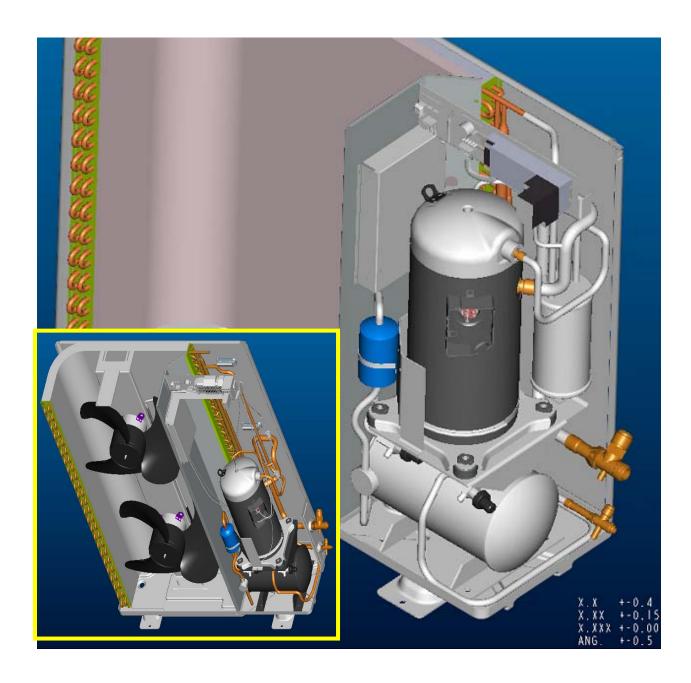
3-Dimensional Views of Selected Component Layout ( not to be used for dimensioning or installation)
